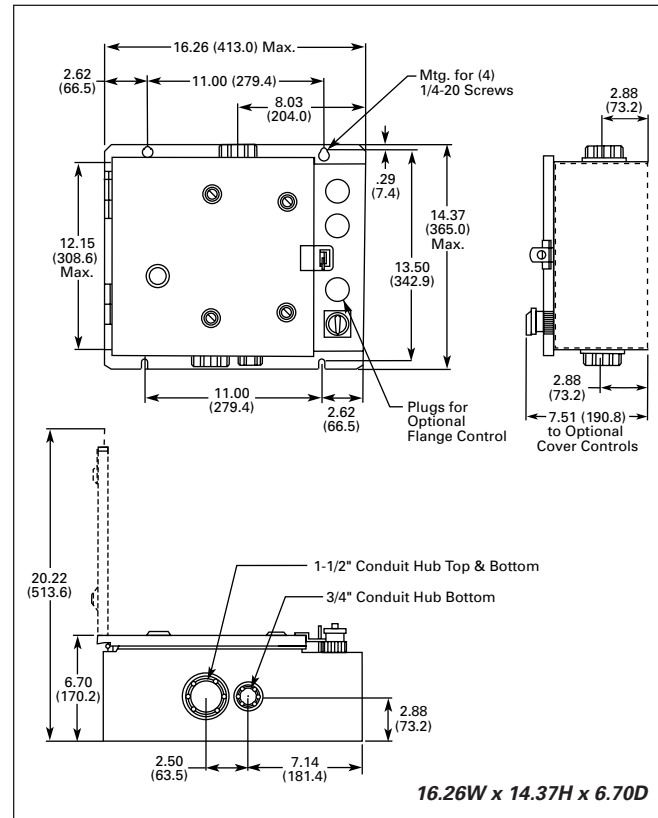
Box 7, Type 4X — Approximate Dimensions in Inches (mm)
